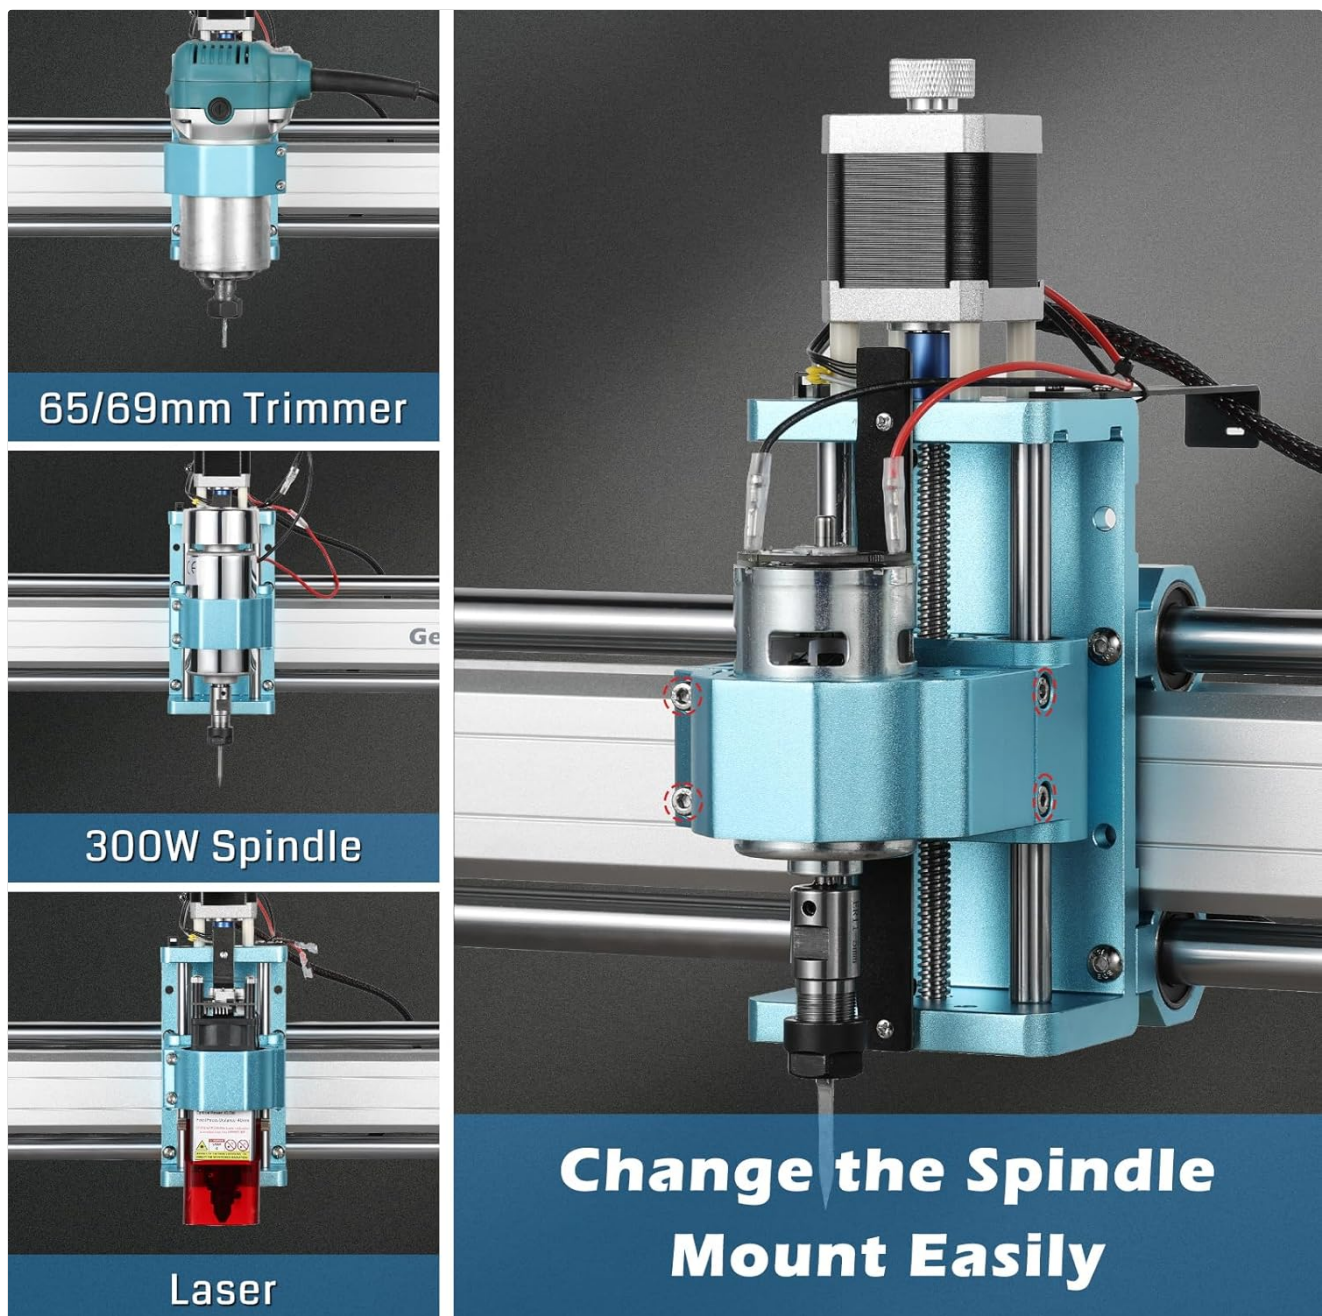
Illustration of different spindle mounts (65/69mm Trimmer, 300W Spindle, Laser) and how to easily change the spindle mount on the machine.
